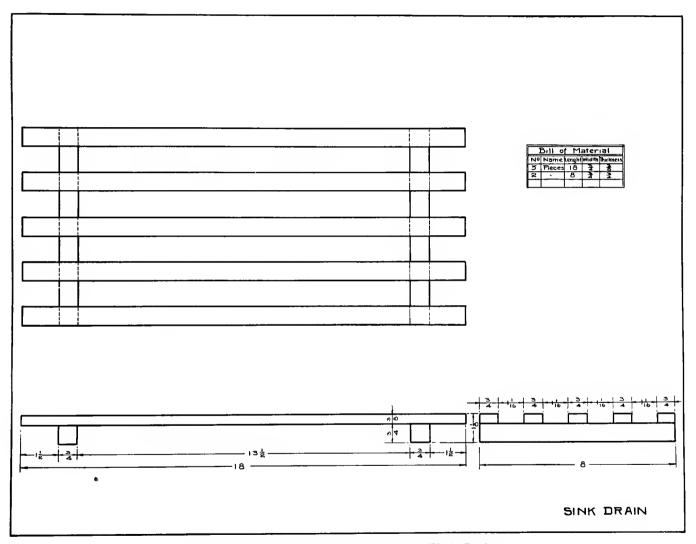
Working Drawing of Sink Drain (Sixth Grade)
